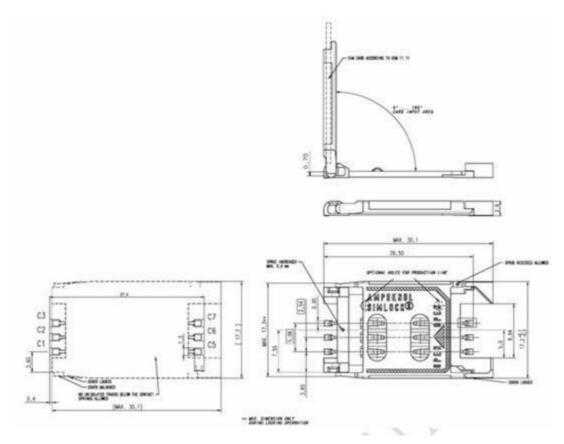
Dimensions of Amphenol C707 10M006 5122 SIM card holder
